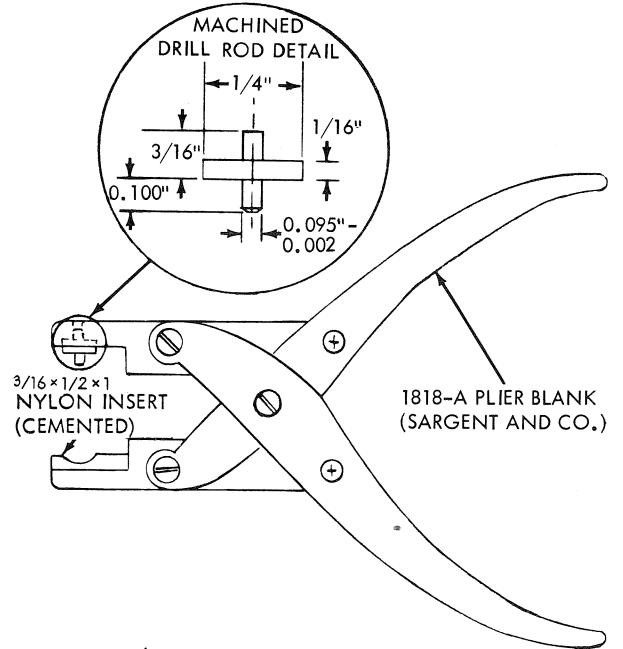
ROLL PIN INSERTING TOOL T-38000-N
